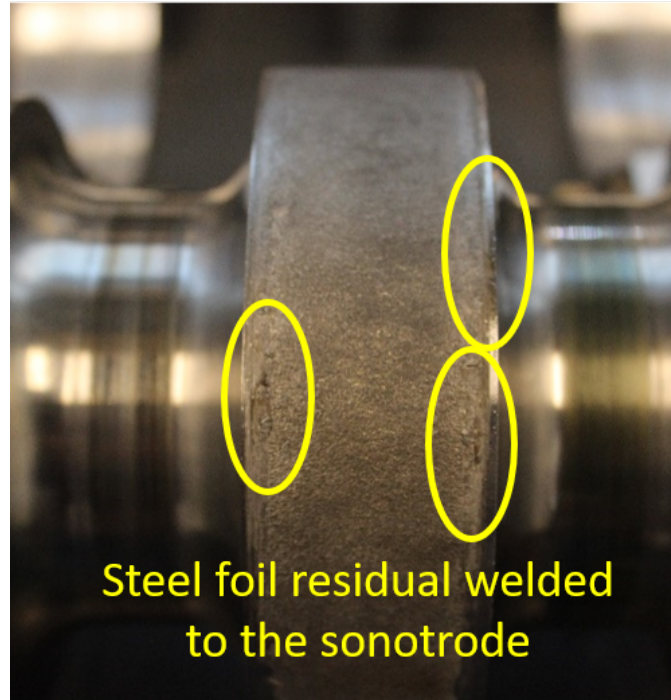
Image of galling that occurred during UAM steel welding.
